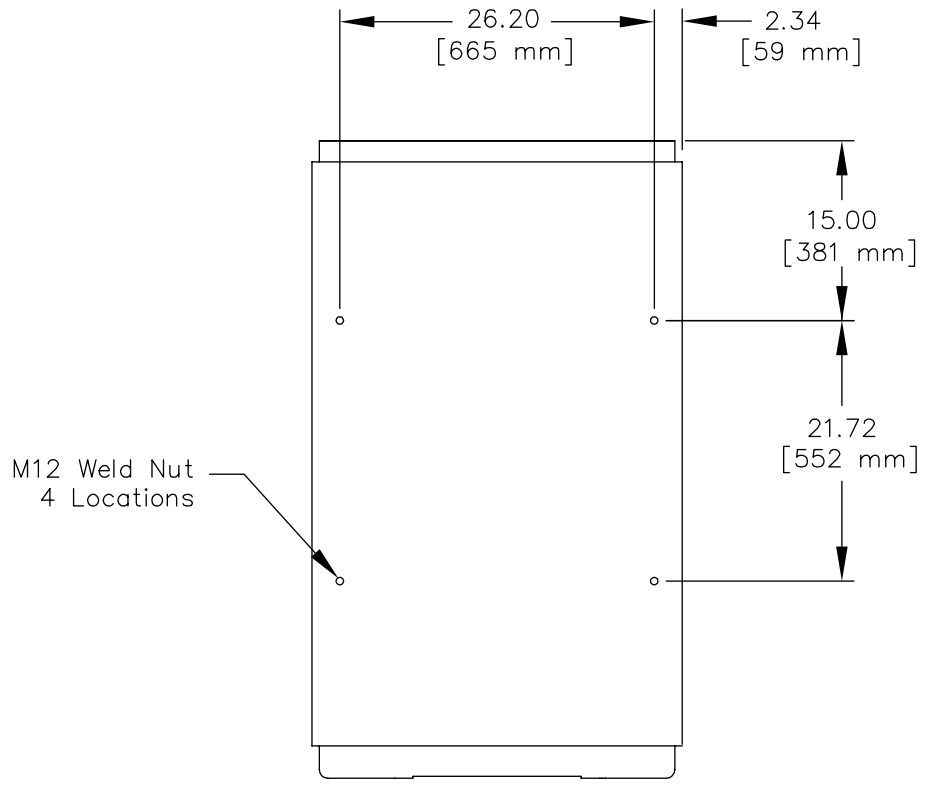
SGI Altix 3300 Weld Nut Locations
